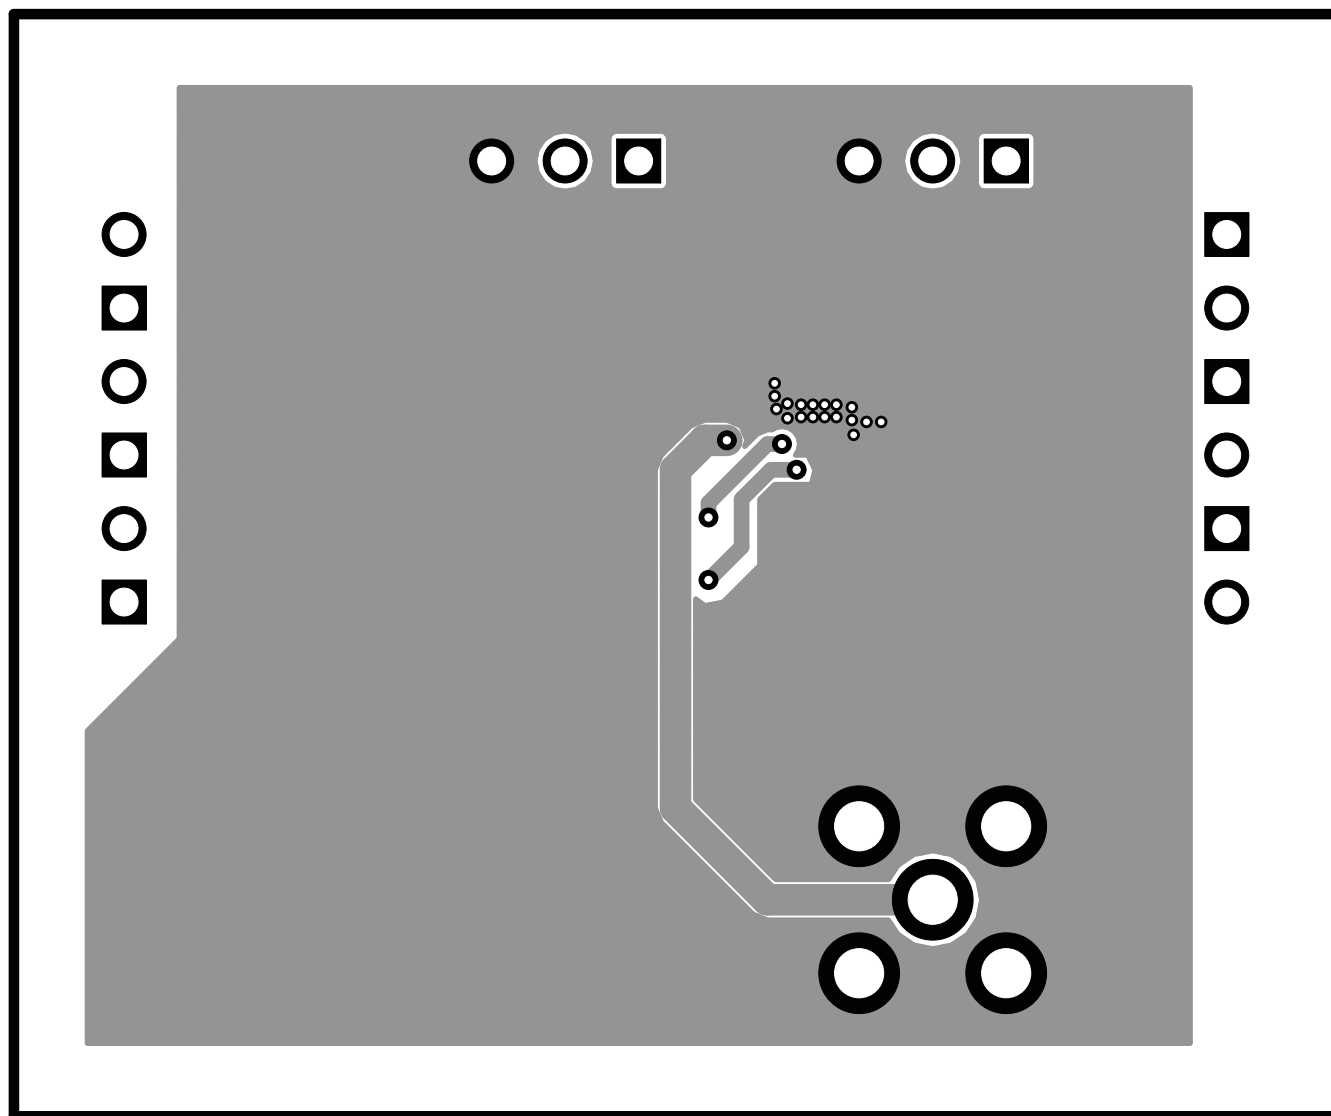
TPS62060EVM Bottom-Side Copper, Bottom View
